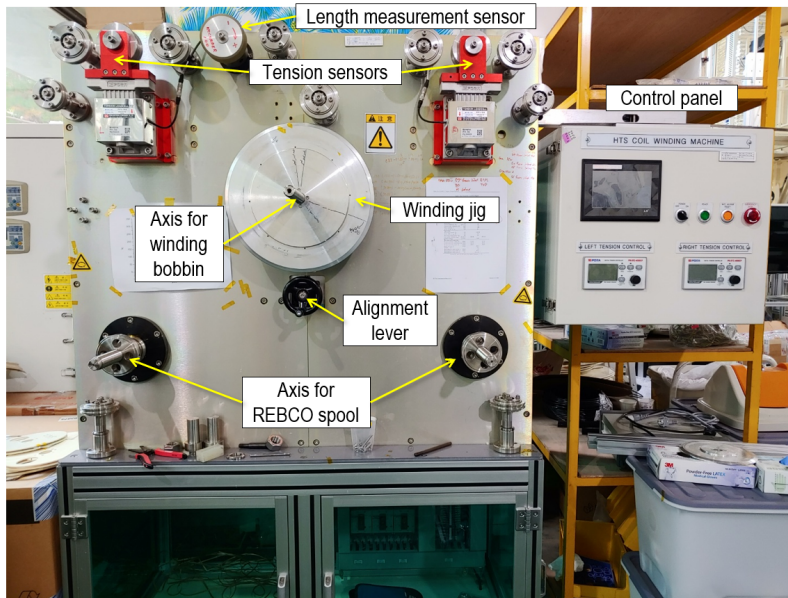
Winding machine for NI HTS racetrack coil winding.
